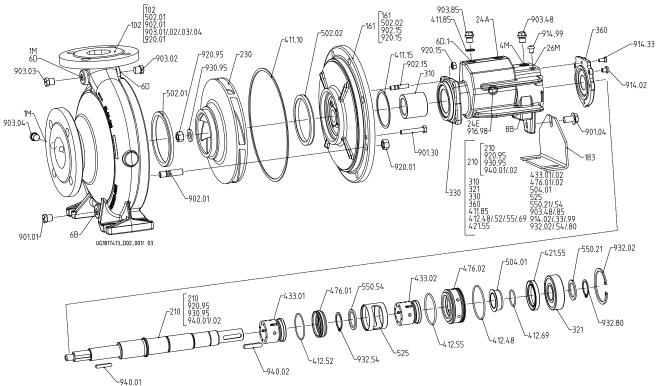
Exploded view of an Etanorm SYT; bearing bracket WS\_25\_LS with double mechanical seal (special design)
